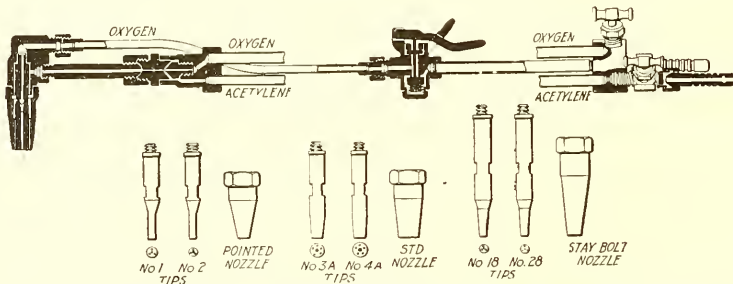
Details of the Cutting Torch Made by the General Welding and Equipment Co.
